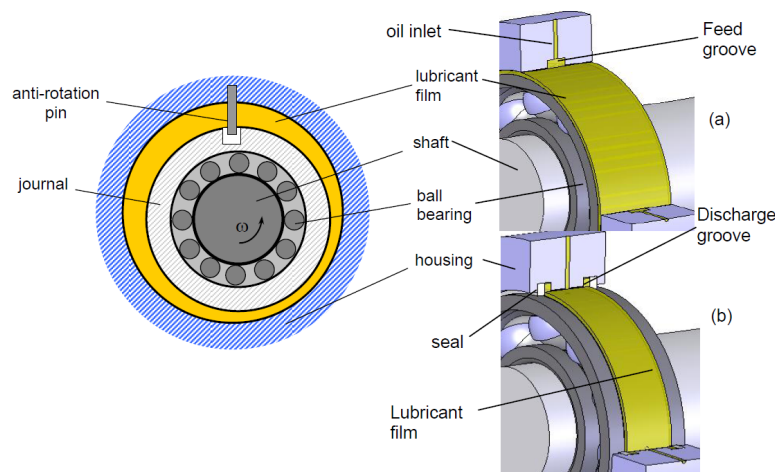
Typical squeeze film damper (SFD) configuration (left) with feed groove and piston ring sealing (right). [22]
